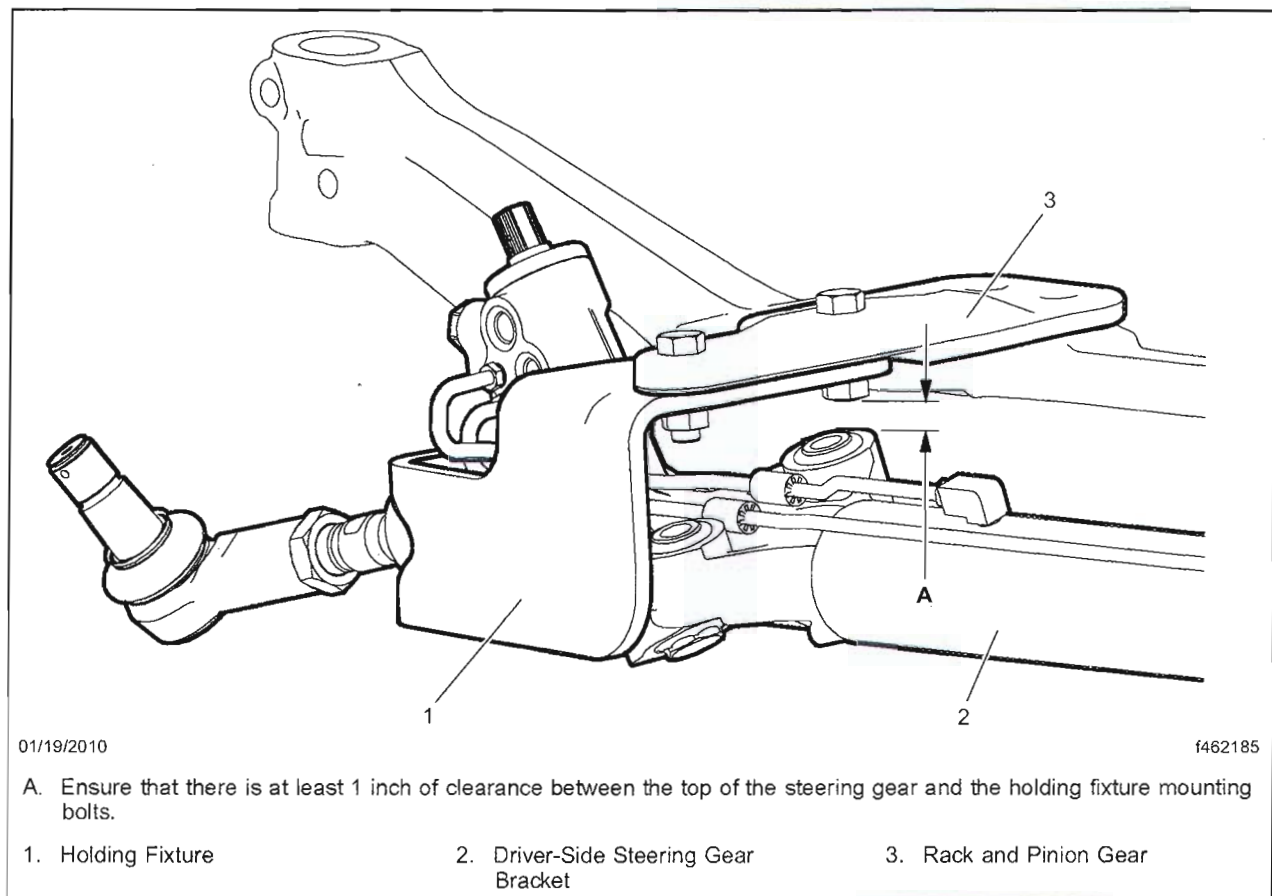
, Rack and Pinion Gear Engaged in Holding Fixture
